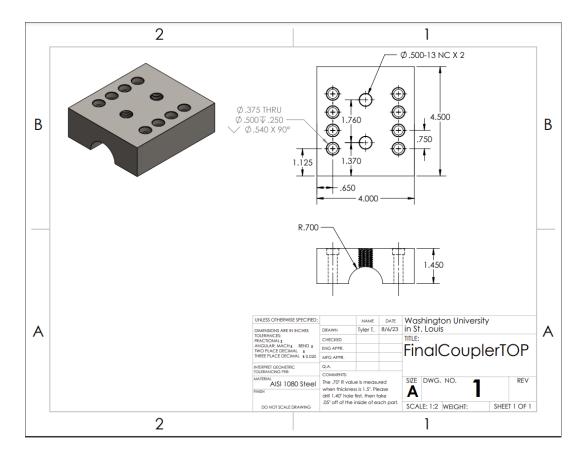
DRAWING OF THE TOP SEGMENT OF THE SWITCH ROD COUPLER.
